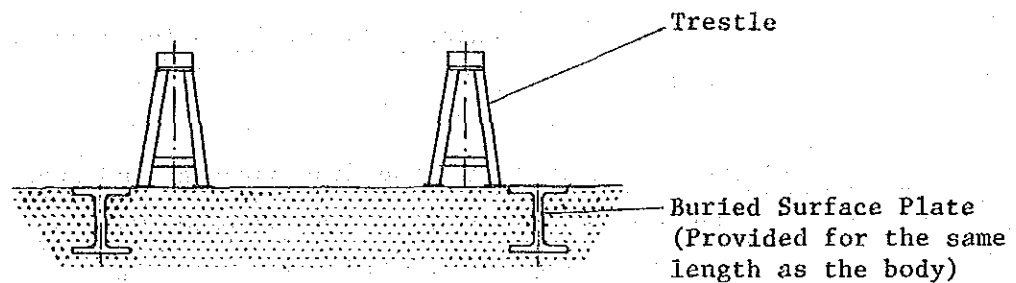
Cross Section of the Buried Surface Plate of the Body Repair Area
